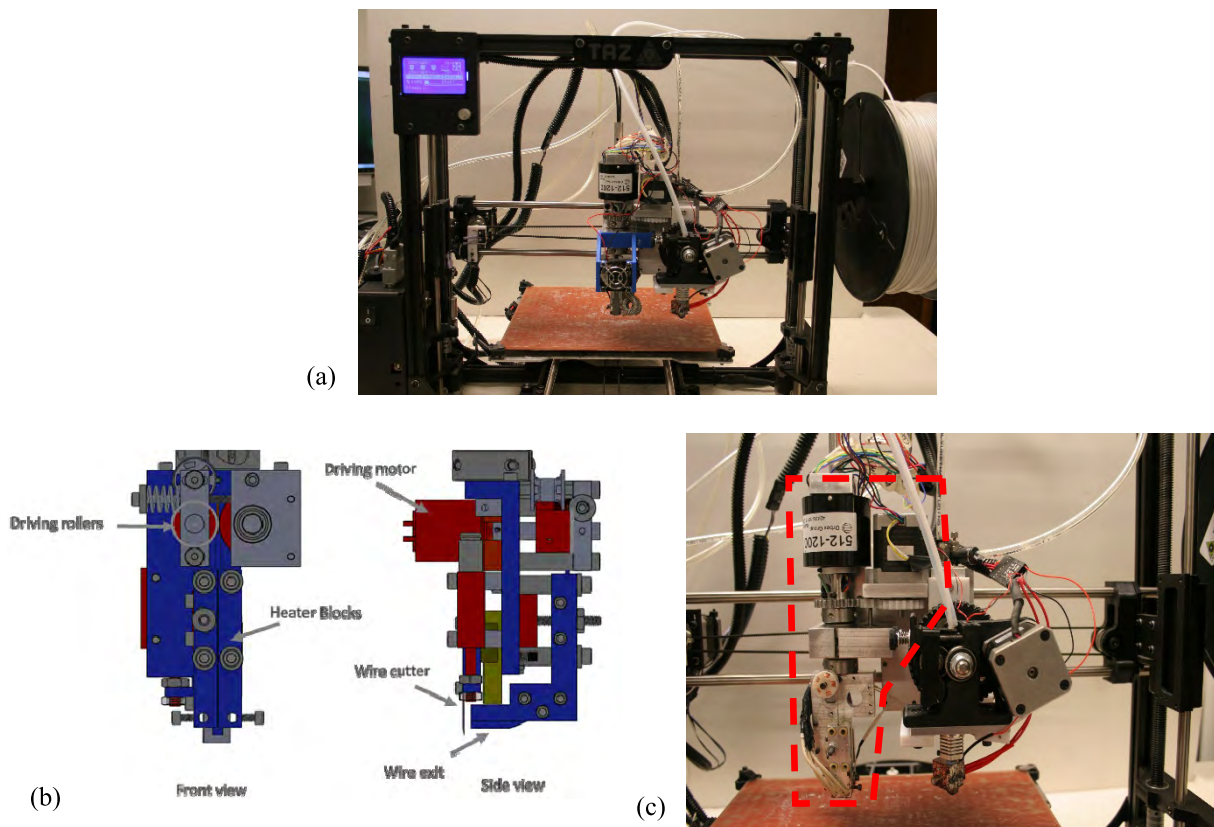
Desktop 3D printing and wire embedding machine. a) modified Lulzbot TAZ 5 printer with wire embedding tool, b) CAD of wire embedding tool, c) wire embedding tool (highlighted by red dashed line) and print engine side-by-side.
